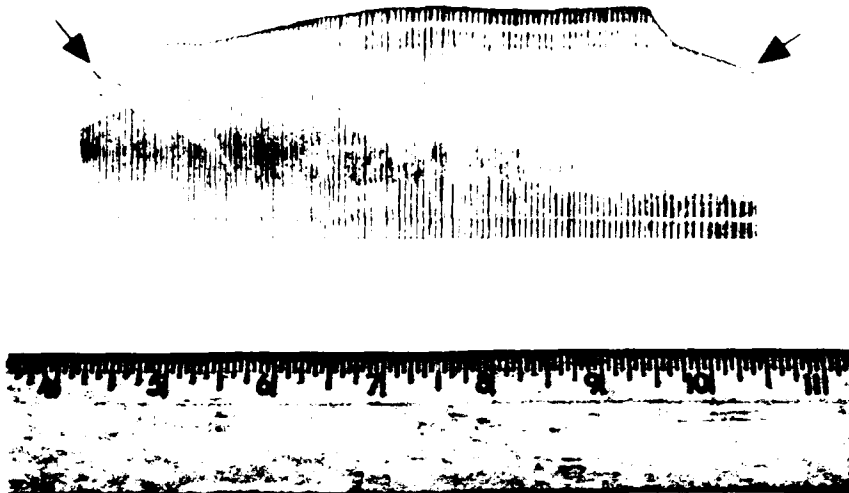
Longitudinal view of fracture surface showing depth of secondary crack.
